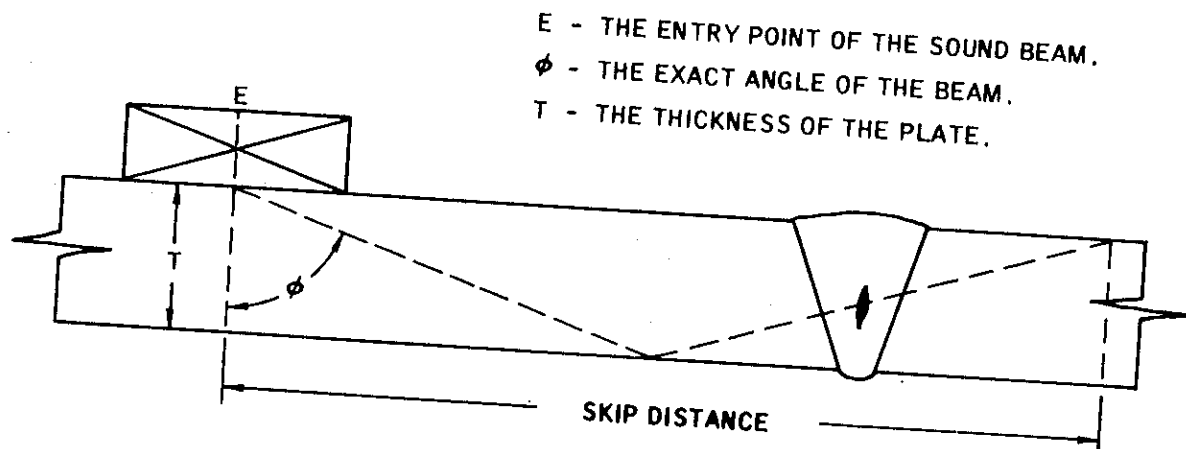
ANGLE BEAM SCAN OF UNGROUND BUTT WELD
